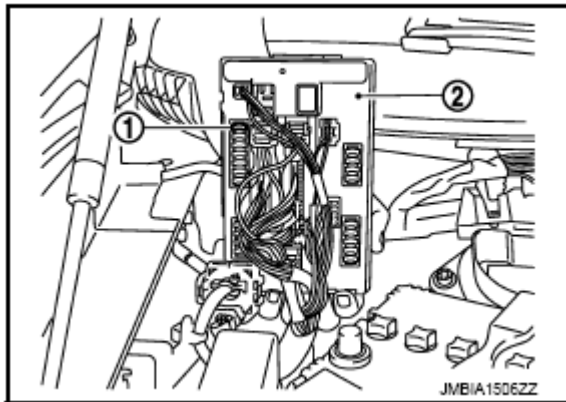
Identifying Fuel Pump Fuse And IPDM E/R
